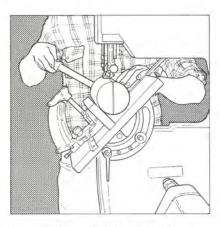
To rip round stock, lock the miter gauge with a miter gauge extension in a tilted table to form a "V", as shown.
